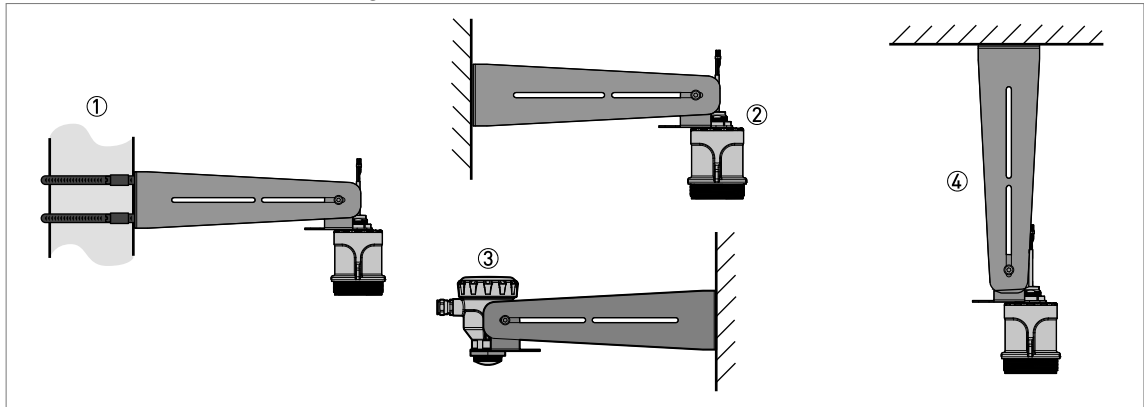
Installation on a wall, ceiling or tube with a long bracket
